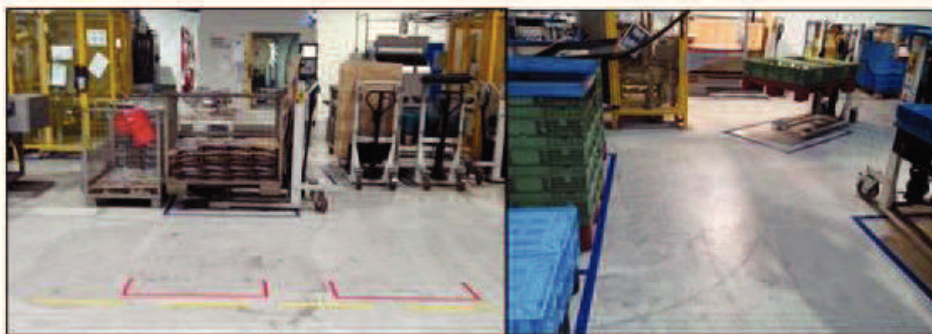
Floor marks to place grid boxes, on the left side, and small load carriers, on the right side.
